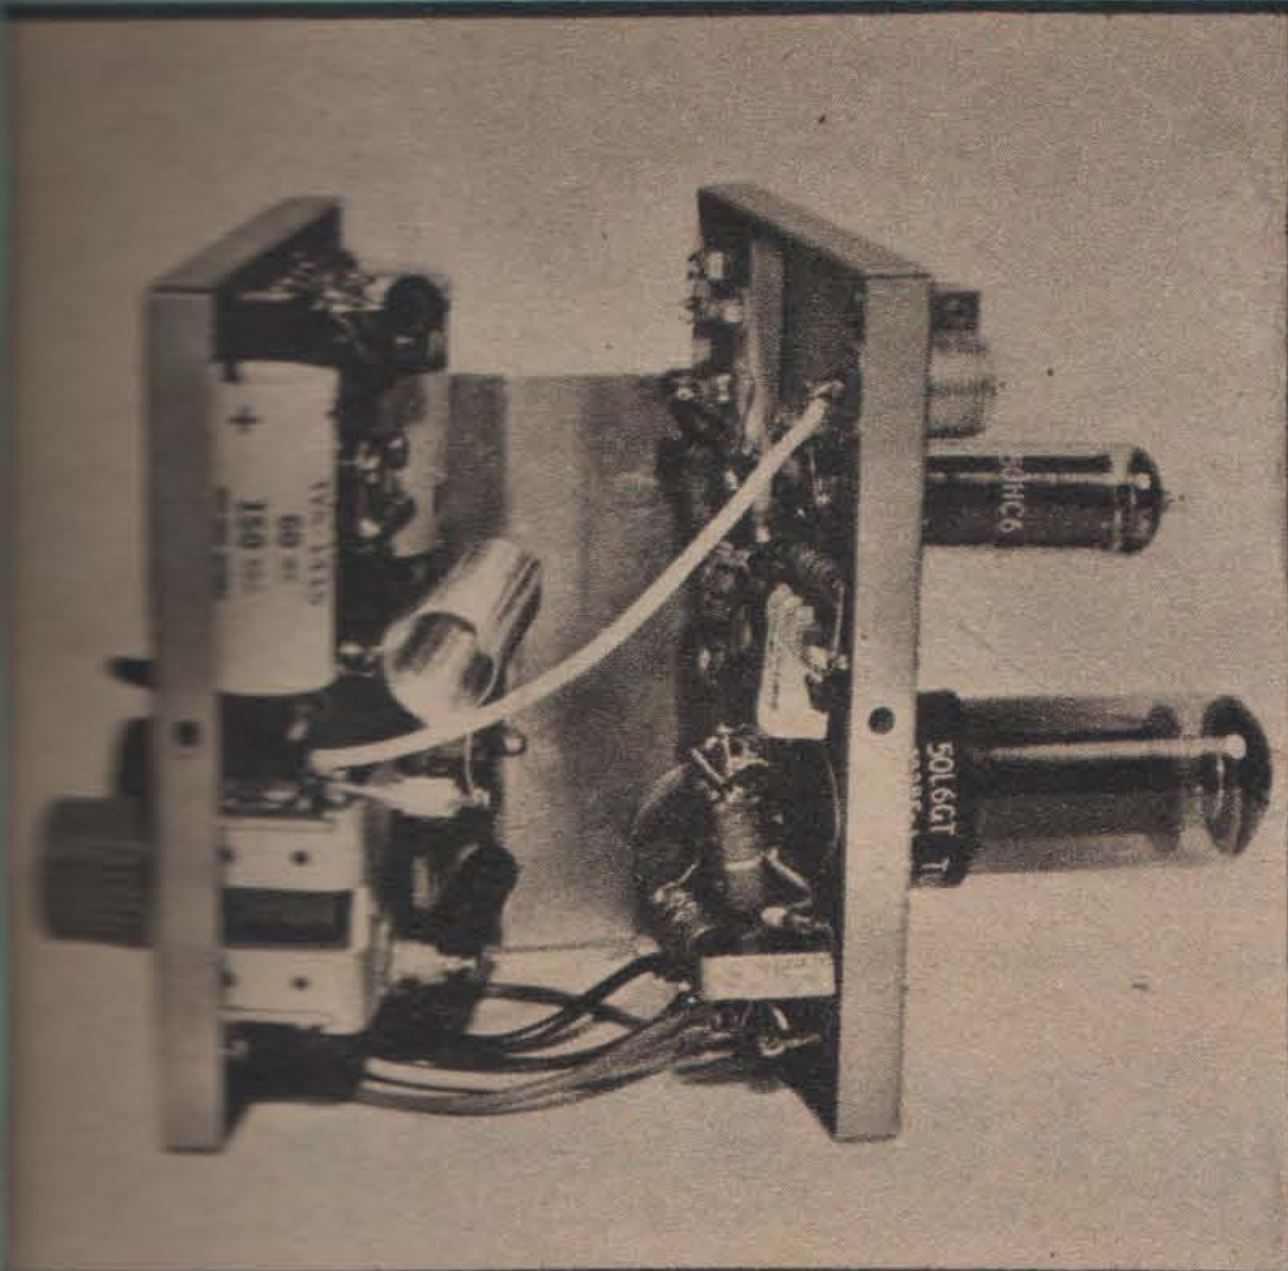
Photo shows how mounting plate shown in Fig. 4 supports front and rear panels to permit transmitter to be operated out of the cabinet.
